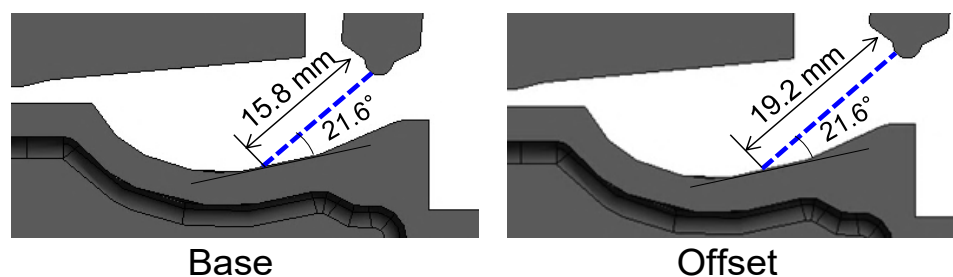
Piston and injector positions in 2 dimensional optical measurement rig cavity
